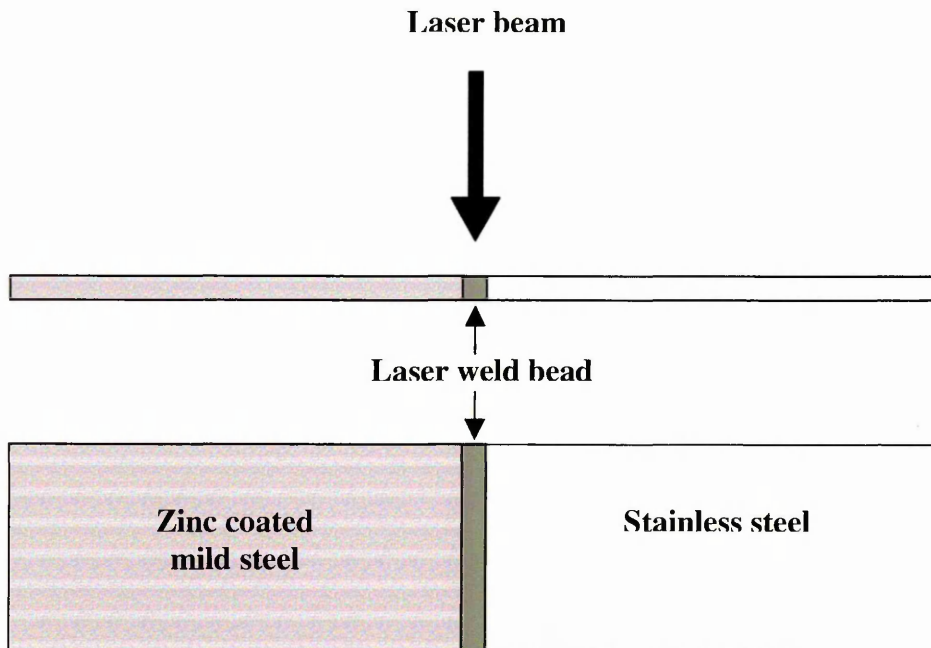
Schematic diagram showing the butt weld configuration
